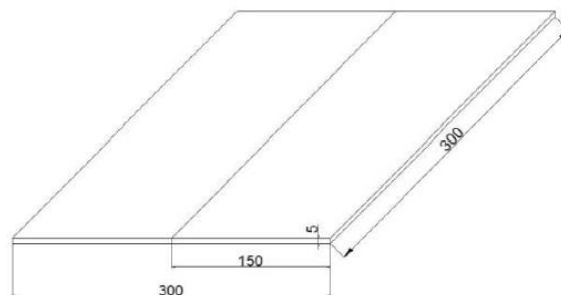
Geometry of the weldment for TIG and ATIG welding
